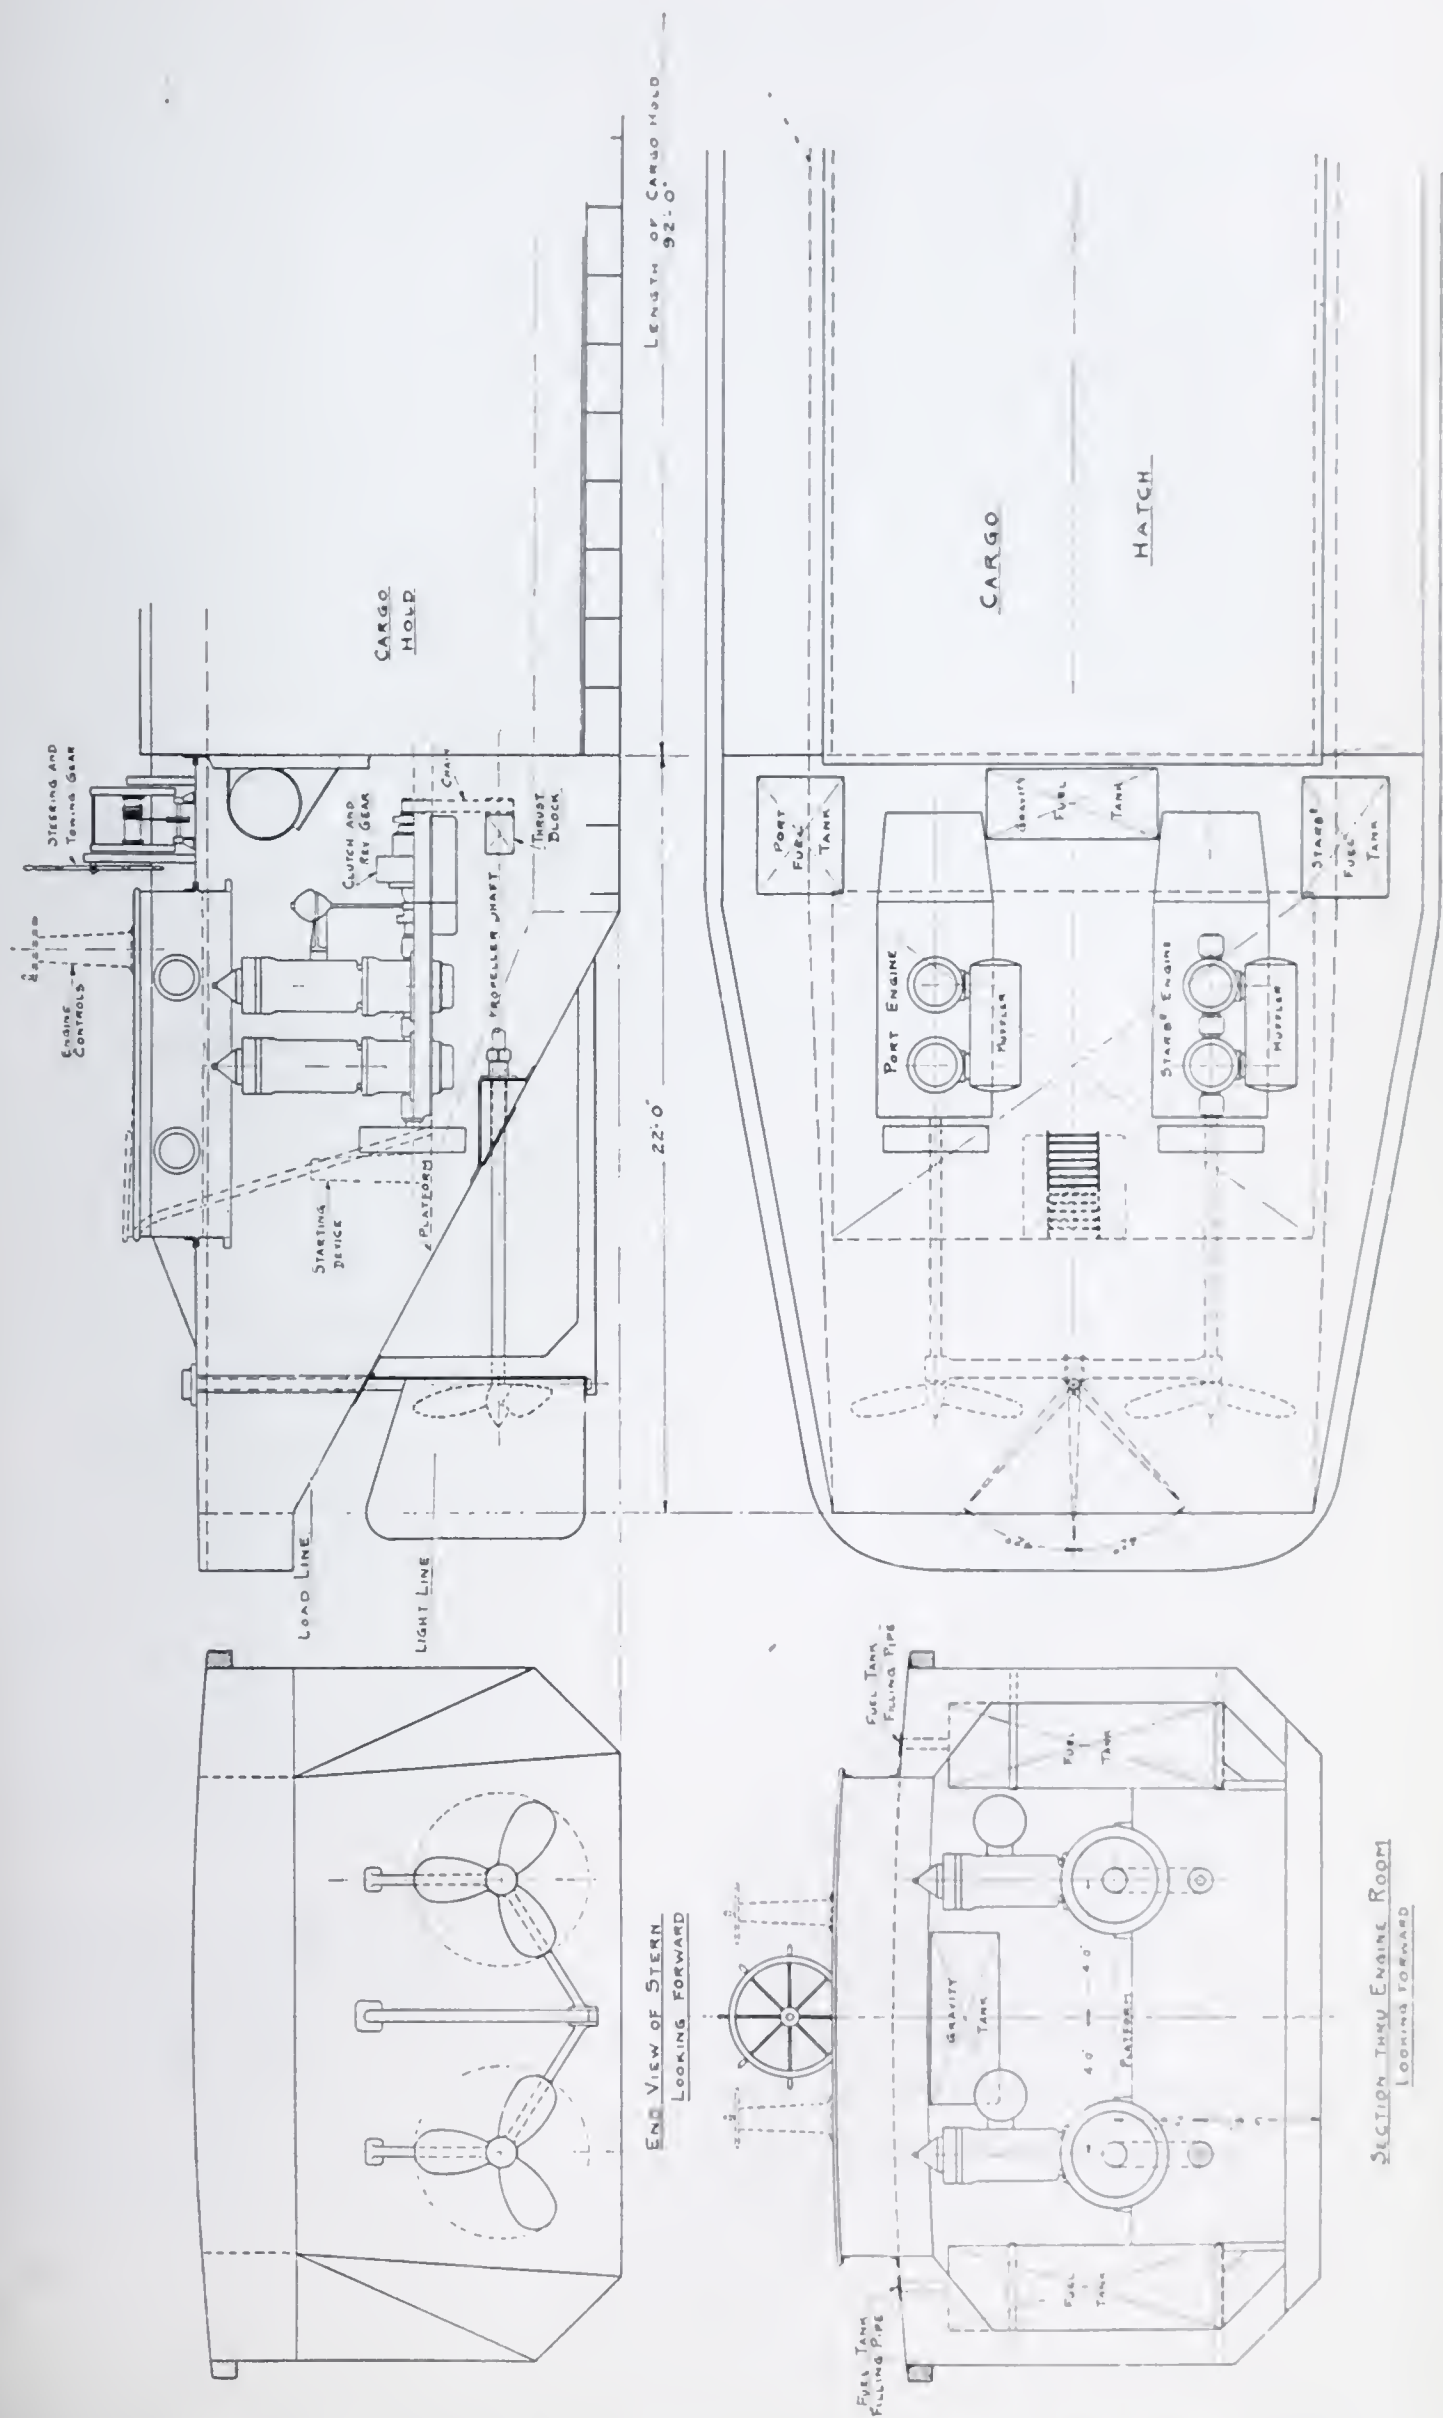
Proposed Engine-Room Arrangement of 132-Foot Power Barge.
